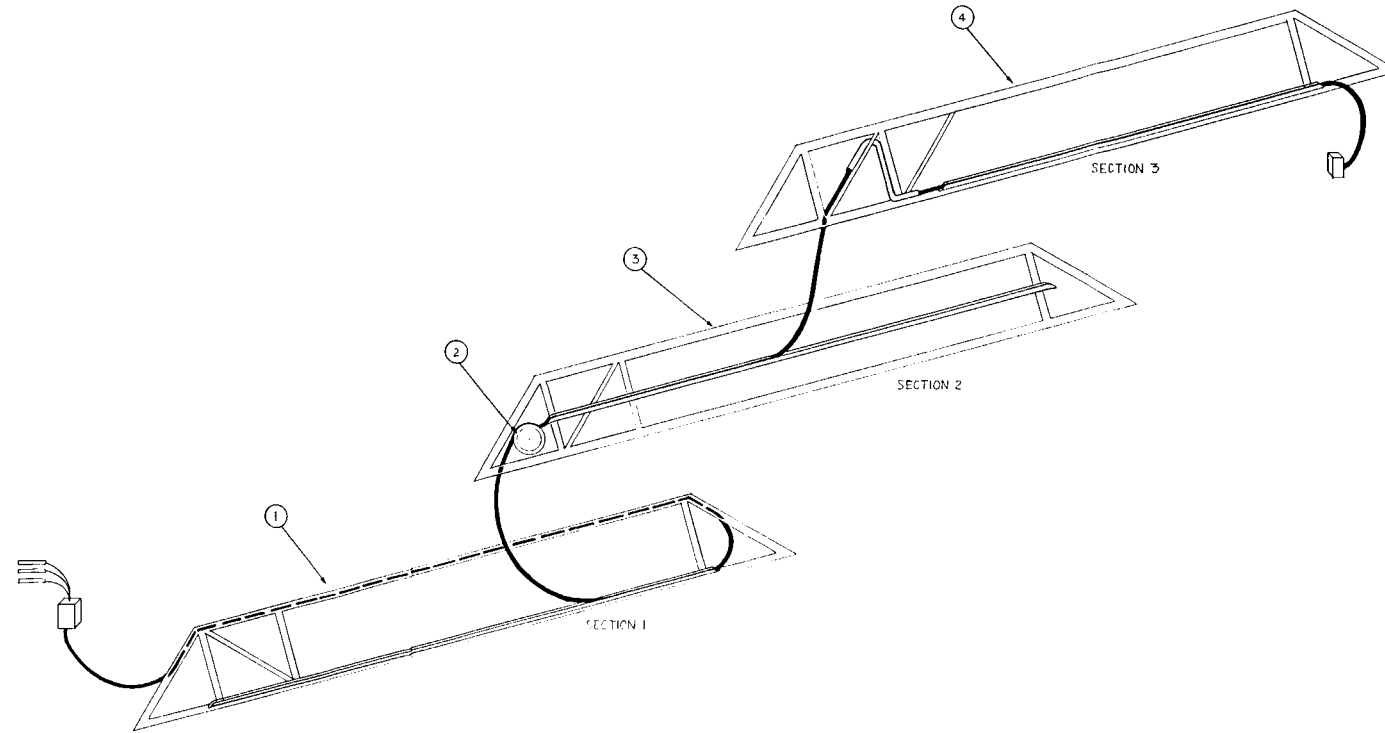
110 VAC Cable Layout Ladder Extended
